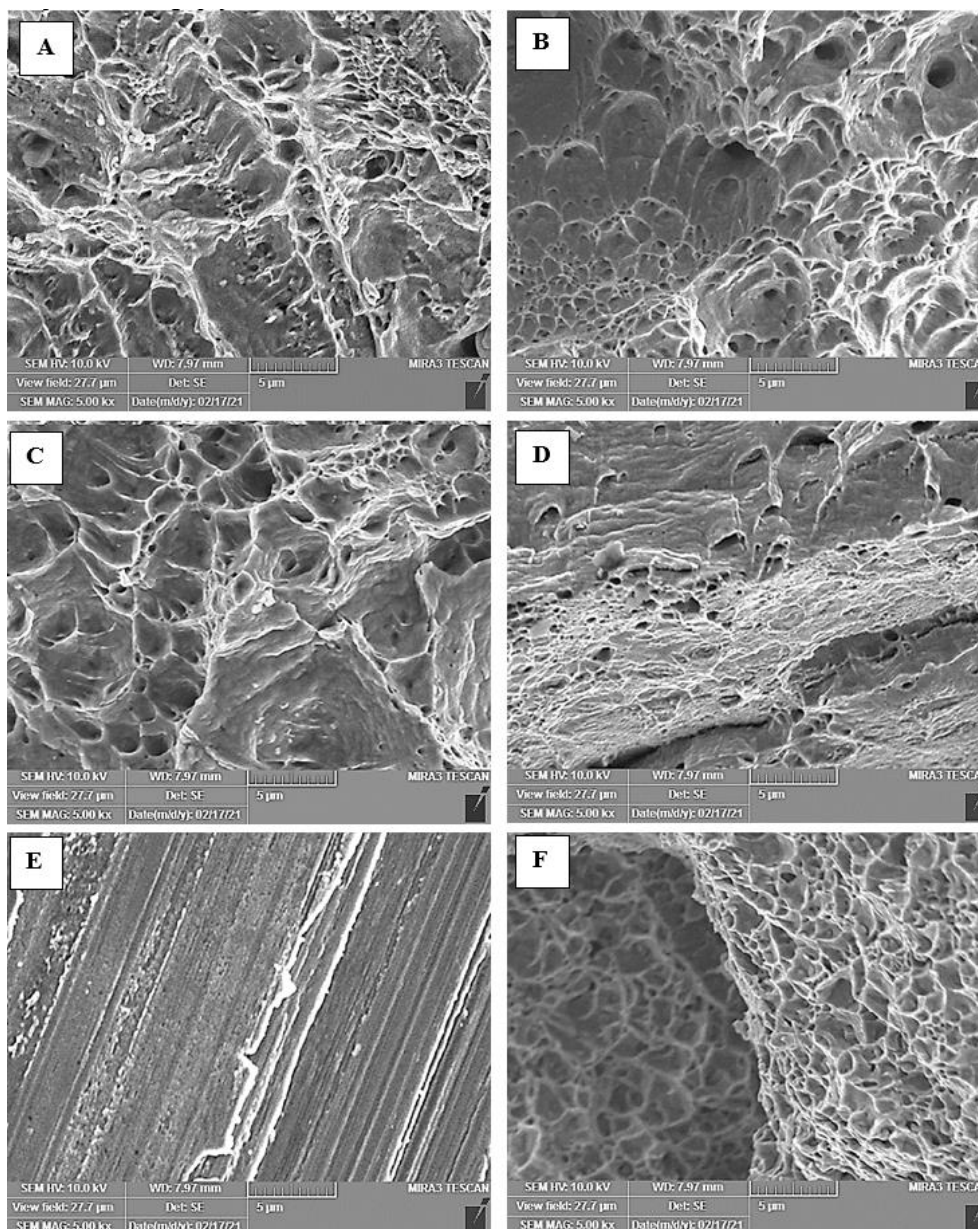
SEM fractography: (A) alloy steel base metal fractography; (B) stainless steel base metal fractography; (C) E7018 welding joint without heat treatment fractography; (D) E7108 welding joint with 600°C heat treatment fractography; (E) E310 welding joint without heat treatment fractography; (F) E310 welding joint with 600°C heat treatment fractography
